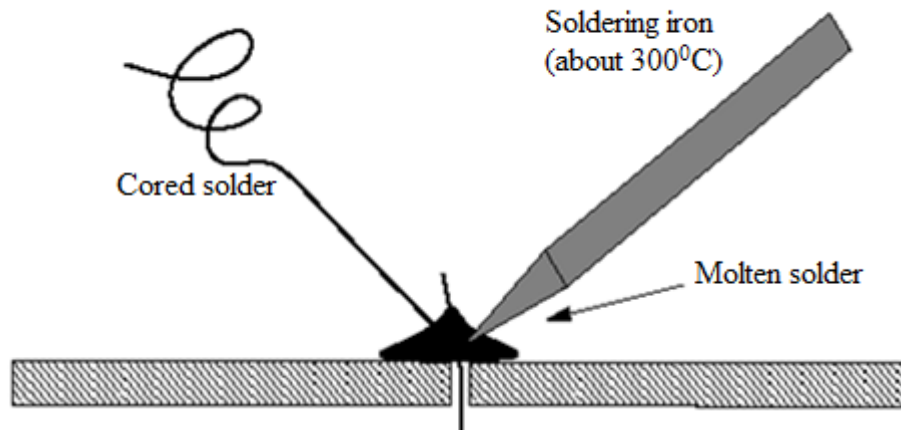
The principle of hand soldering technique. (Clear, 2011)
